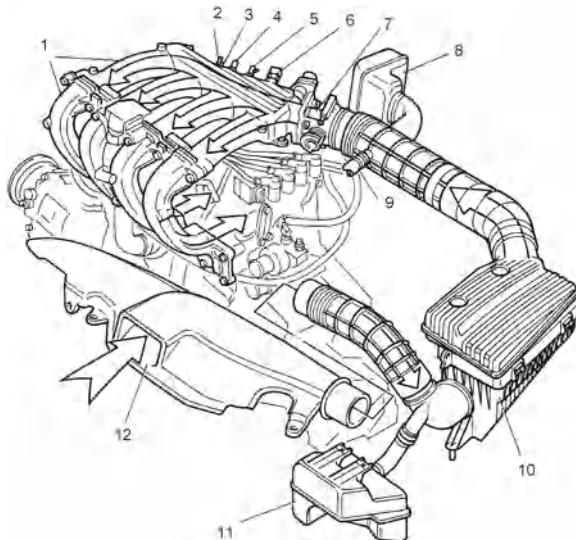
Intake manifold complete with the external air inlet, air filter and throttle body (courtesy of FIAT)
